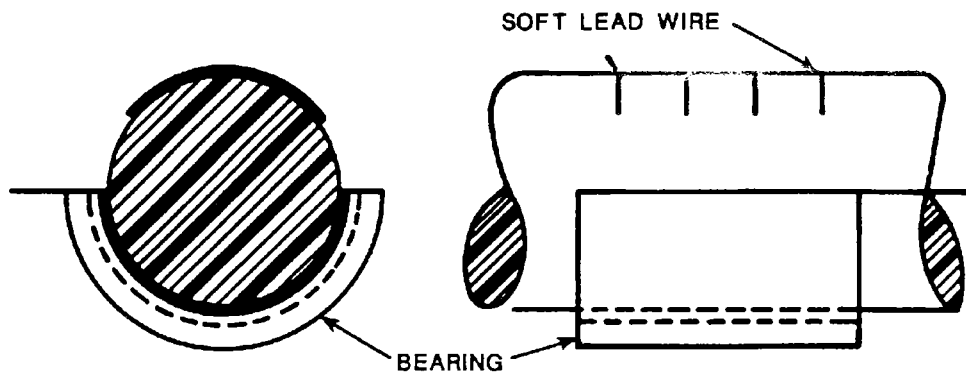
Placing Lead Wires for Reading Bearing Clearance
